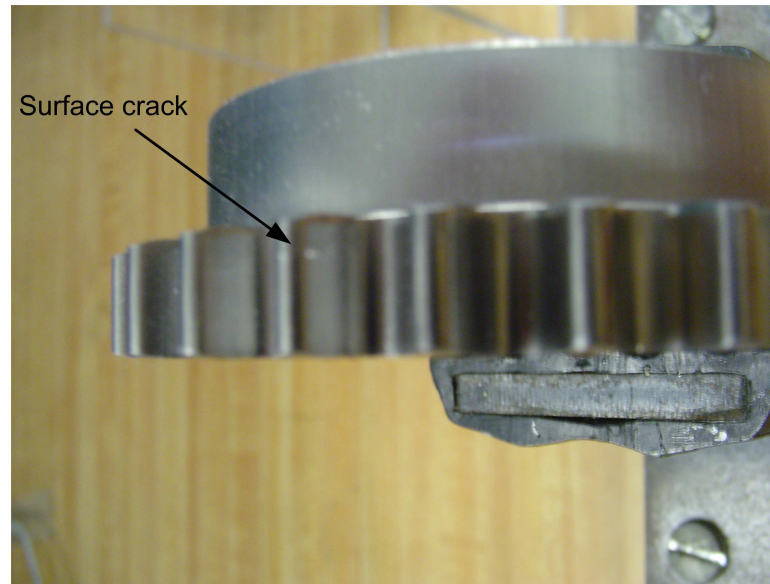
Surface crack on a tooth of a complex multilevel part (parts courtesy of Plansee AG).
